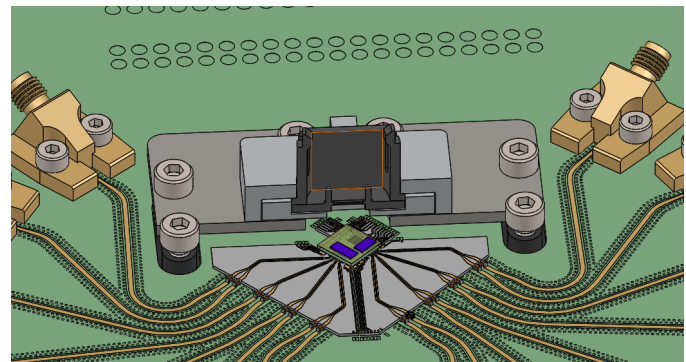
Scheme of the Datacom Demonstrator. Rosenberger RPC 1.85 connectors on the PCB are shown at the extreme left and right, from which electrical lines are going over PCB and LTCC to reach the PIC, a cross sectional view of the top (connector-holding) plate with the connector.
